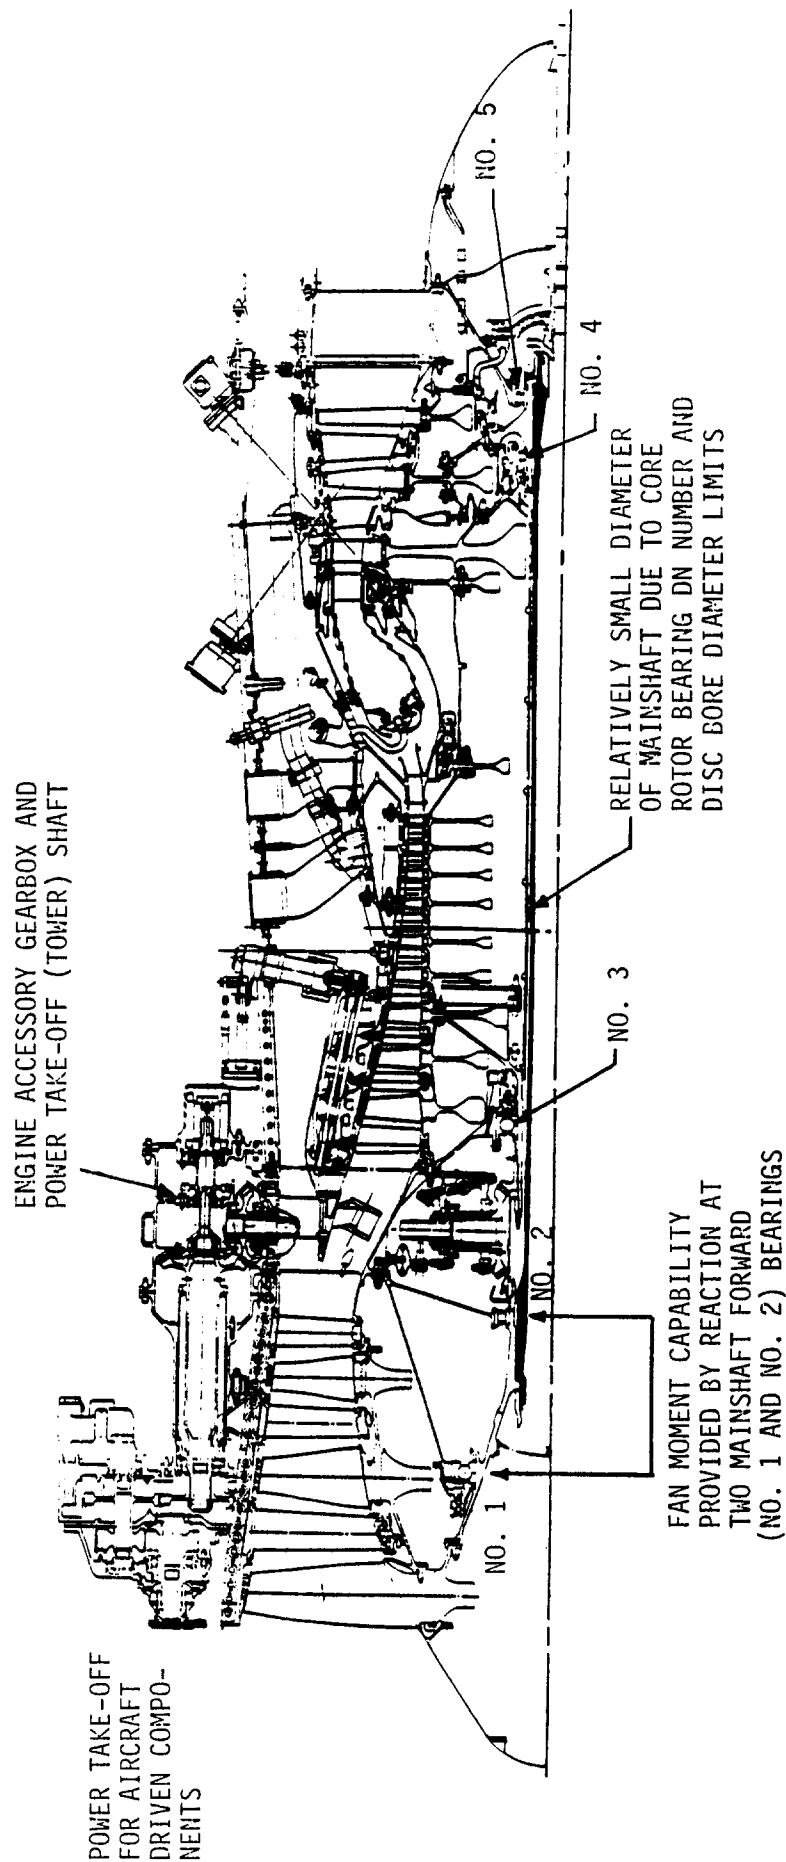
Present-day five-bearing turboprop engine structural and accessory gear box arrangement
